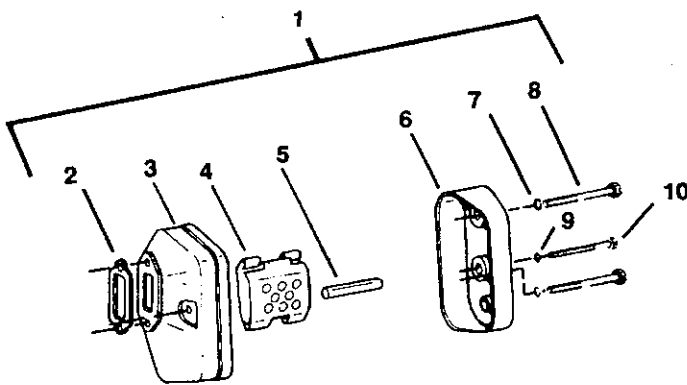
FIGURE VII - PARTS LIST MUFFLER ASSEMBLY
